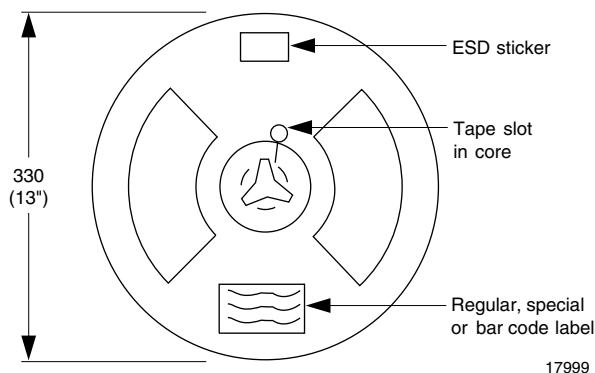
Tape and Reel Shipping Medium (EIA-481, revision A, and IEC 60286), 2000 Units per Reel
